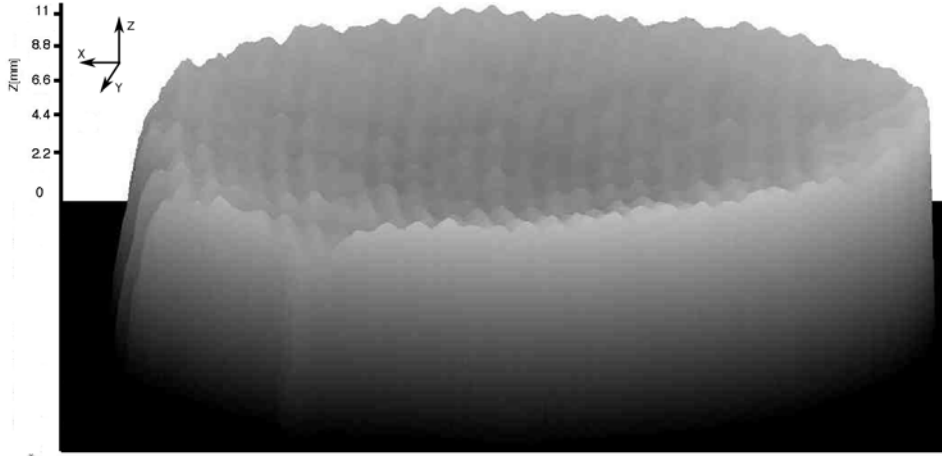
3D shape reconstruction of a lens mold using kinoforms to project fringe pattern over a lens non specular surface (scale in millimeters).
